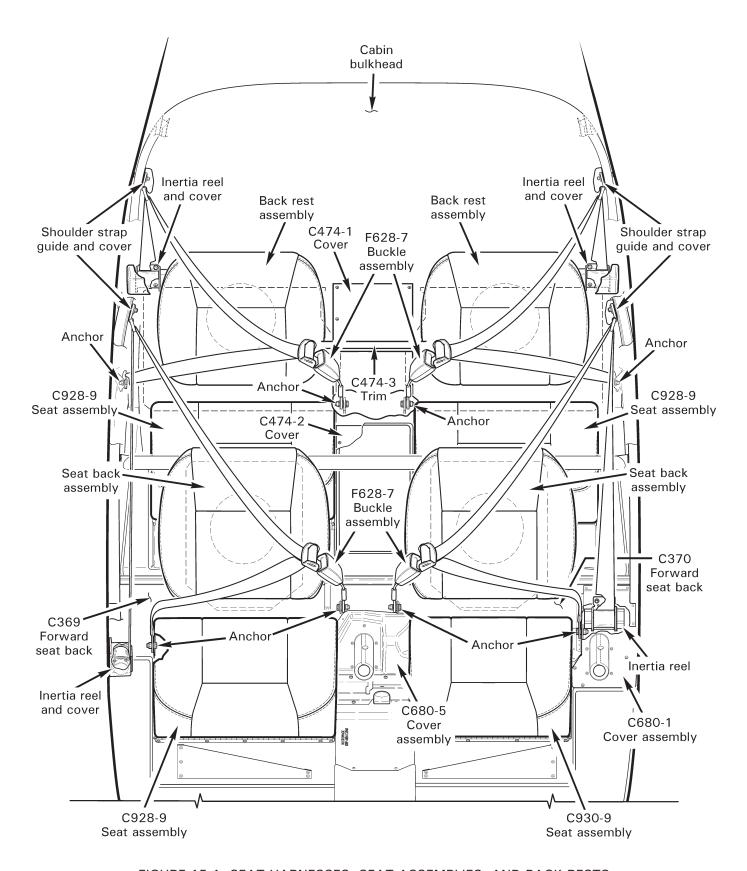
SEAT HARNESSES, SEAT ASSEMBLIES, AND BACK RESTS
